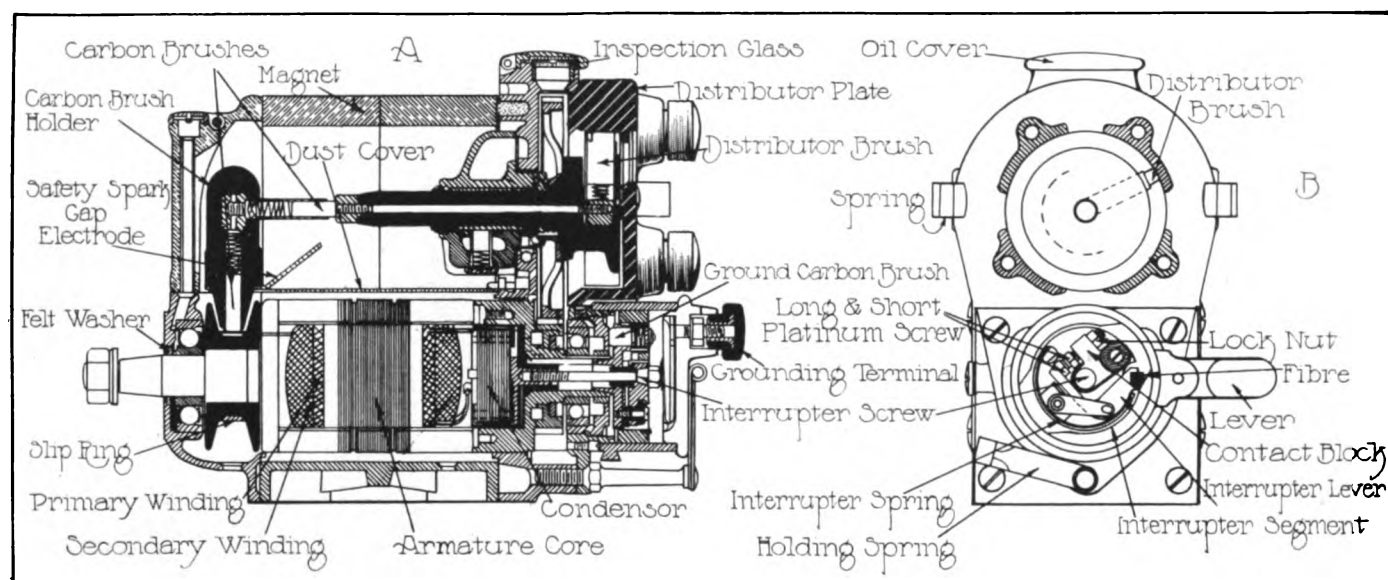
Sectional View of Bosch ZU4 Magneto, Illustrating General Arrangement of Parts; B, Outlining the Contact Breaker and Distributor.
